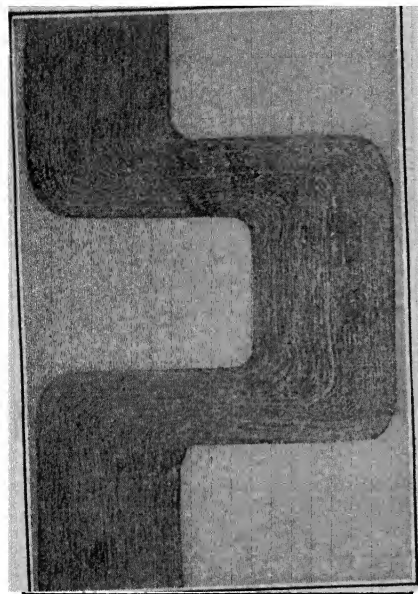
Reduced from direct ink print of forged crankshaft.
